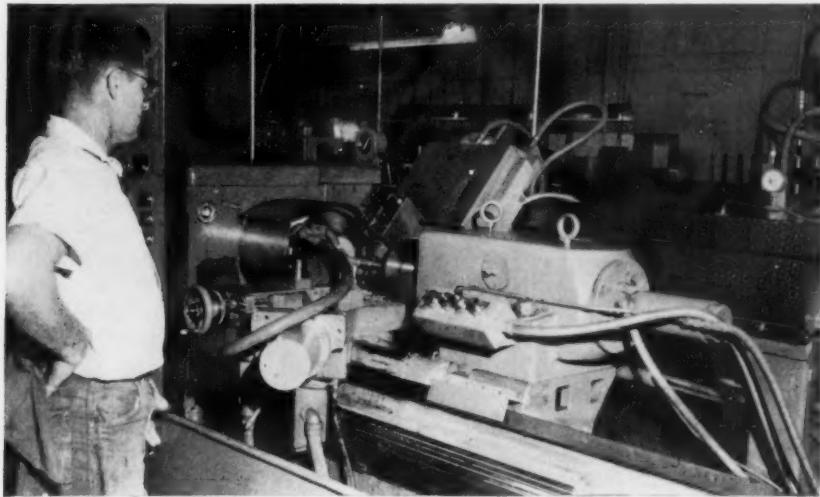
Machining tool steel shafts on a Cleveland Profiling lathe. These steel shafts, which measure 6½ inches in length, require turning to five separate diameters.
